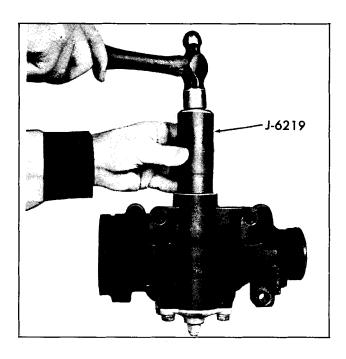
Installing Pitman Shaft Seals Using Tool J 6219
